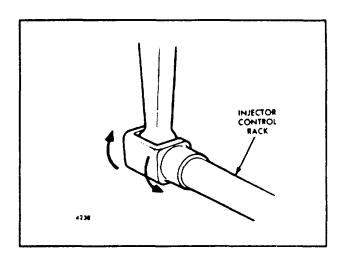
Checking Rotating Movement of Injector Control Rack
